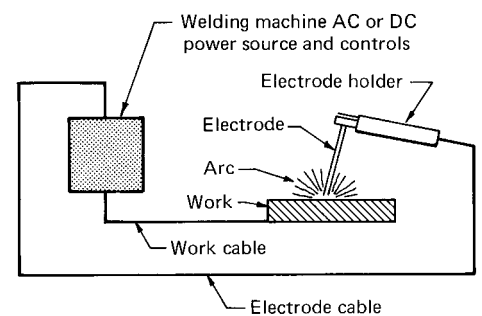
Basic arc welding circuit. ac, alternating current; dc, direct current
